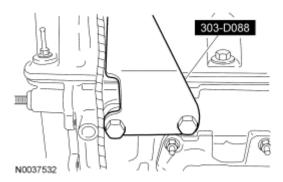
Installing Special Tool To LH Cylinder Head Courtesy of FORD MOTOR CO.
